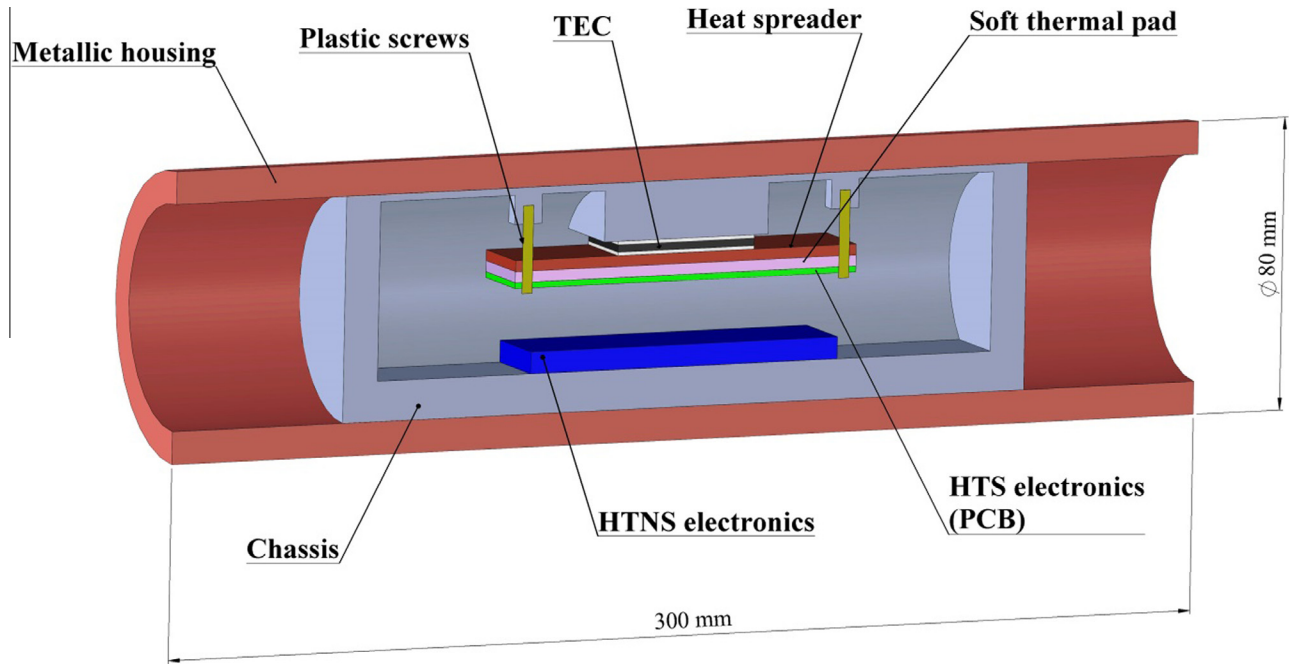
Illustration of the longitudinal section of the final design. The thermoelectric cooler is clamped between the aluminum pad and the heat spreader through two plastic screws. The remaining volume within the chassis is filled with thermal insulation.
